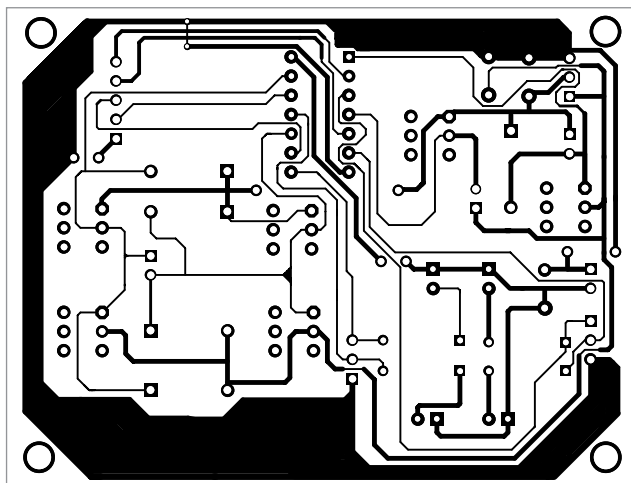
Actual-size PCB layout of the sensing peripheral devices circuit
